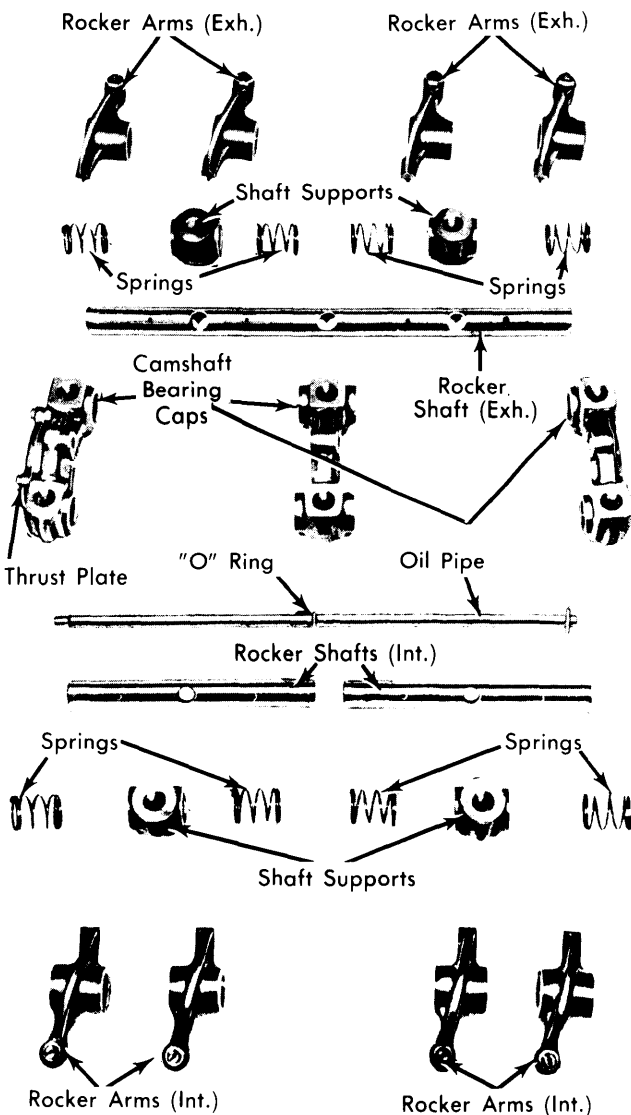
Exploded View of Rocker Arm & Shaft Assembly
